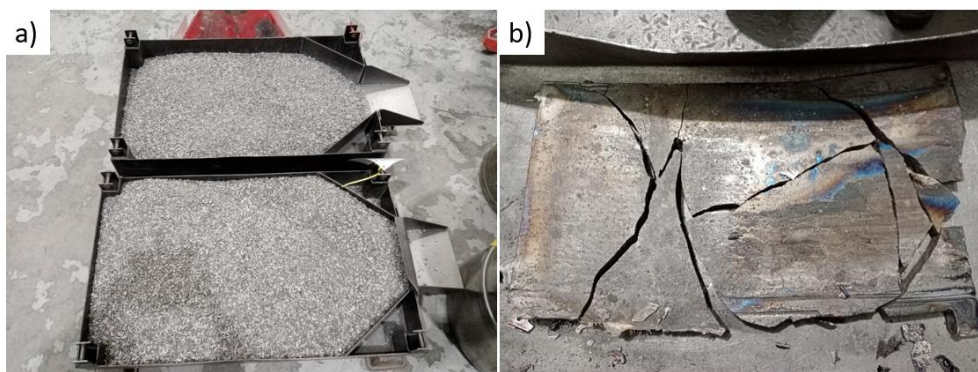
Crushed MnAlC pieces -158kg (a), cast by steel mould 33kg/cast (b)
